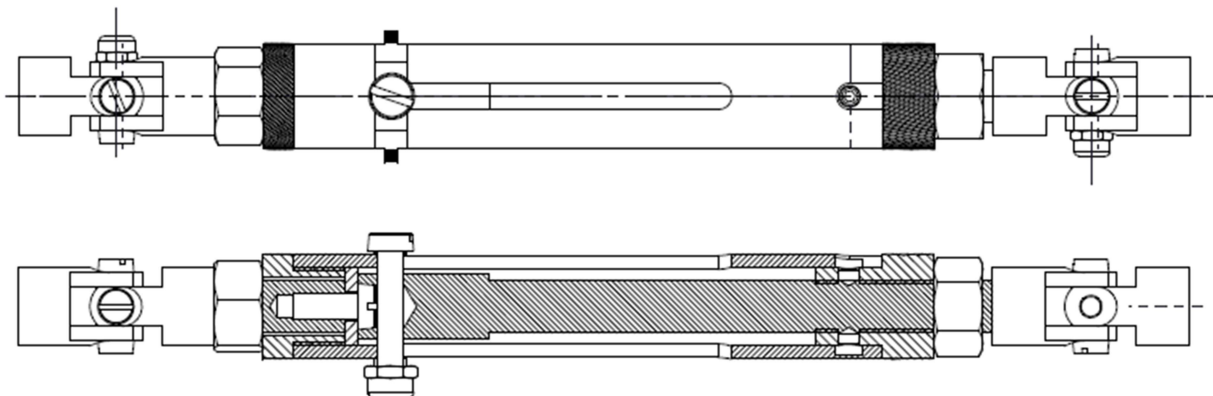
An image demonstrating the fully assembled longitudinal element (translating strut, turn heads and uni-joints) as per the generated engineering drawings created using the Solidworks Software (Ref: Engineering Drawings in Appendix D)
